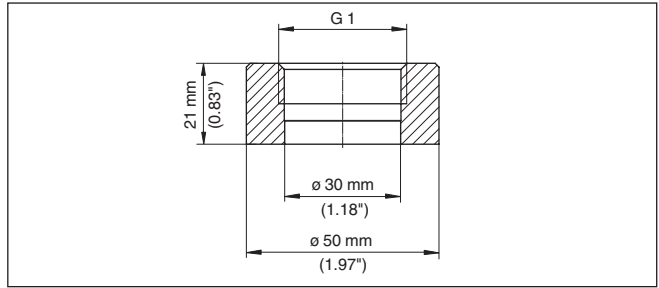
Dimensions of welded socket, G1 (ISO 228-1)
